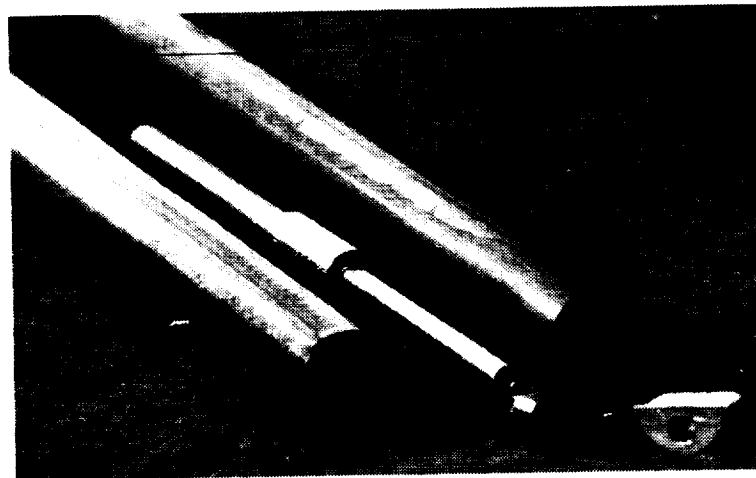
Photograph of the parts of the heat pipe prior to final welding, showing the “D-shaped” screen wick, heat-pipe container, end caps, and fill tube.
